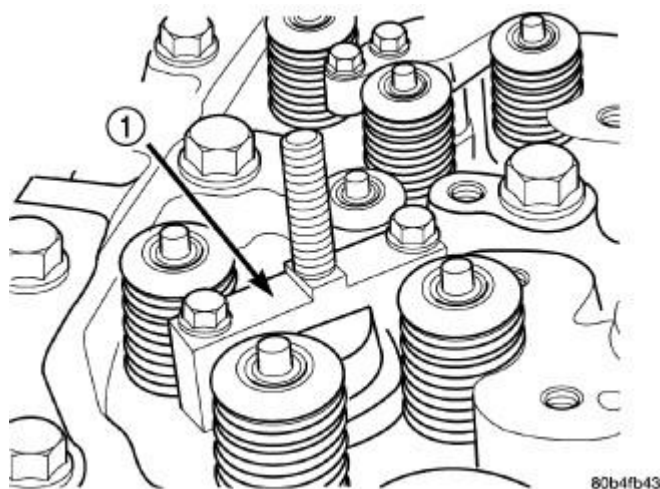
Spring Compressor Mounting Base-Part of Tool 8319
